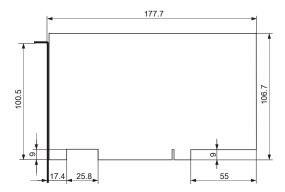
Standard half-size 32-bit PCI card - Dimensions
